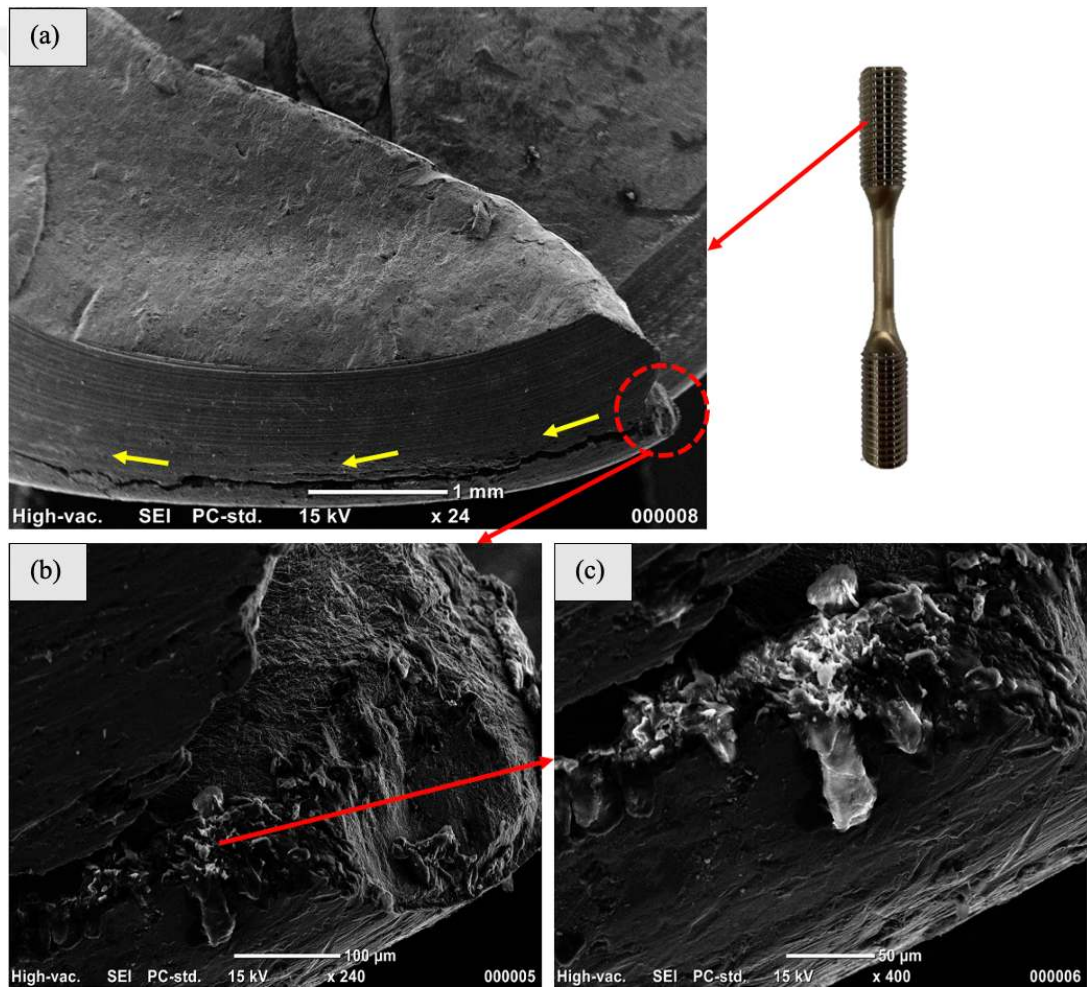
Alpha case layered fatigue coupon fracture surface in radius region
